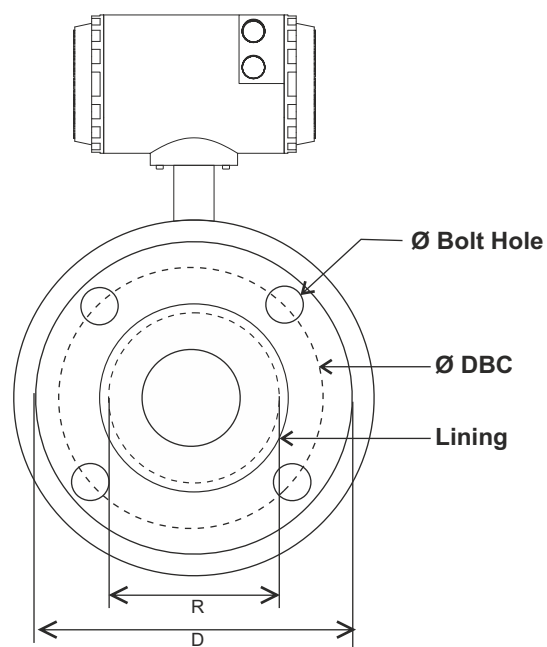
SIDE VIEW WITH FLANGE DETAILS
